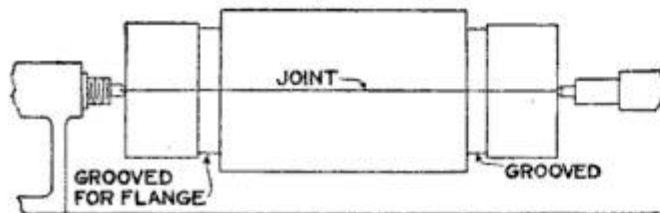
Grooves Turned in the Core Prints of a Pattern for Receiving the Flange
